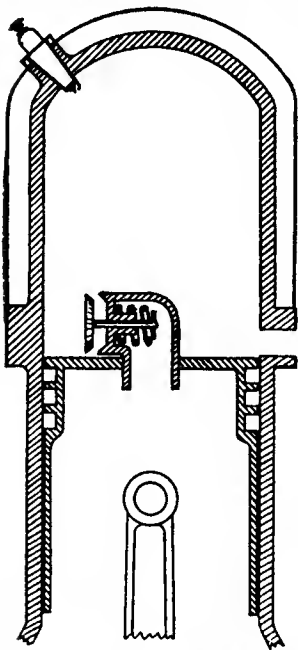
Sectional view of two-cycle engine with horizontal valve in piston suggested by C. E. Duryea about a year ago.
